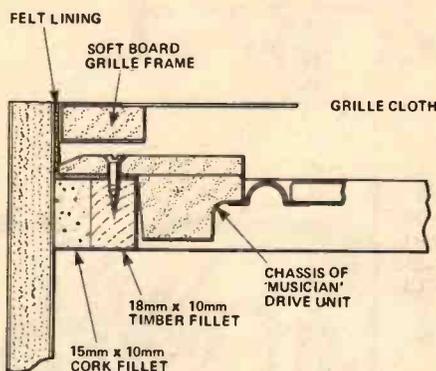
Horizontal cross-section through the enclosure with the Musician drive unit in position.
